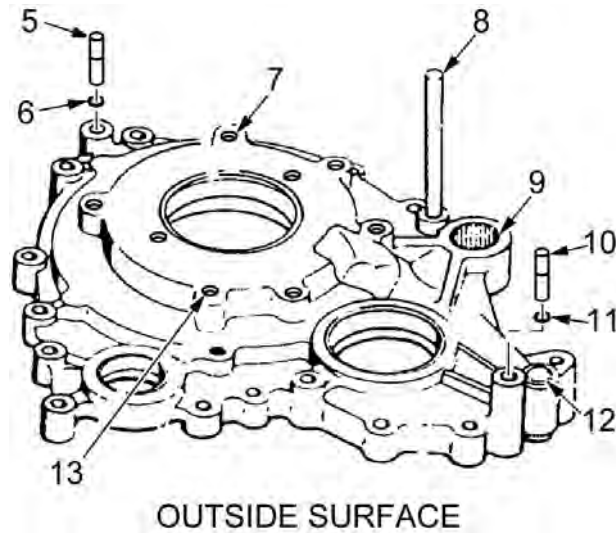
Pins, Retaining Rings, Needle Roller Bearing, and Plug Valve Removal.
